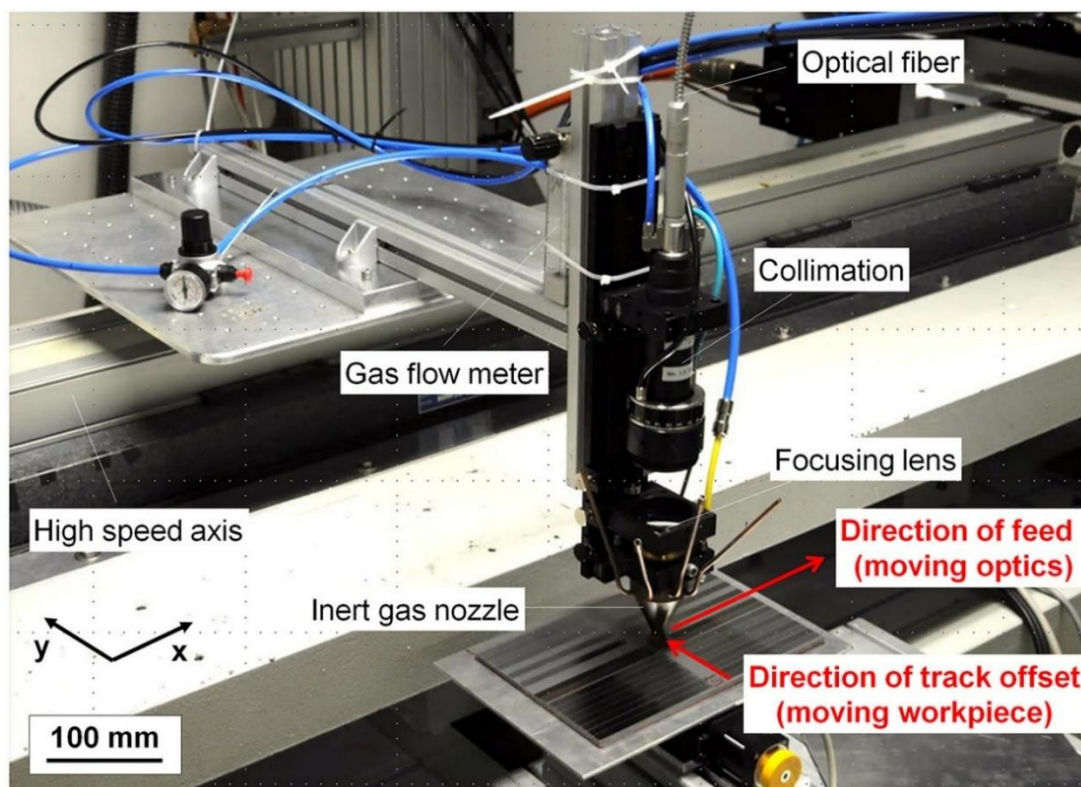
experimental set-up for laser processing with nozzle gas shielding (Temmler et al., 2020)
